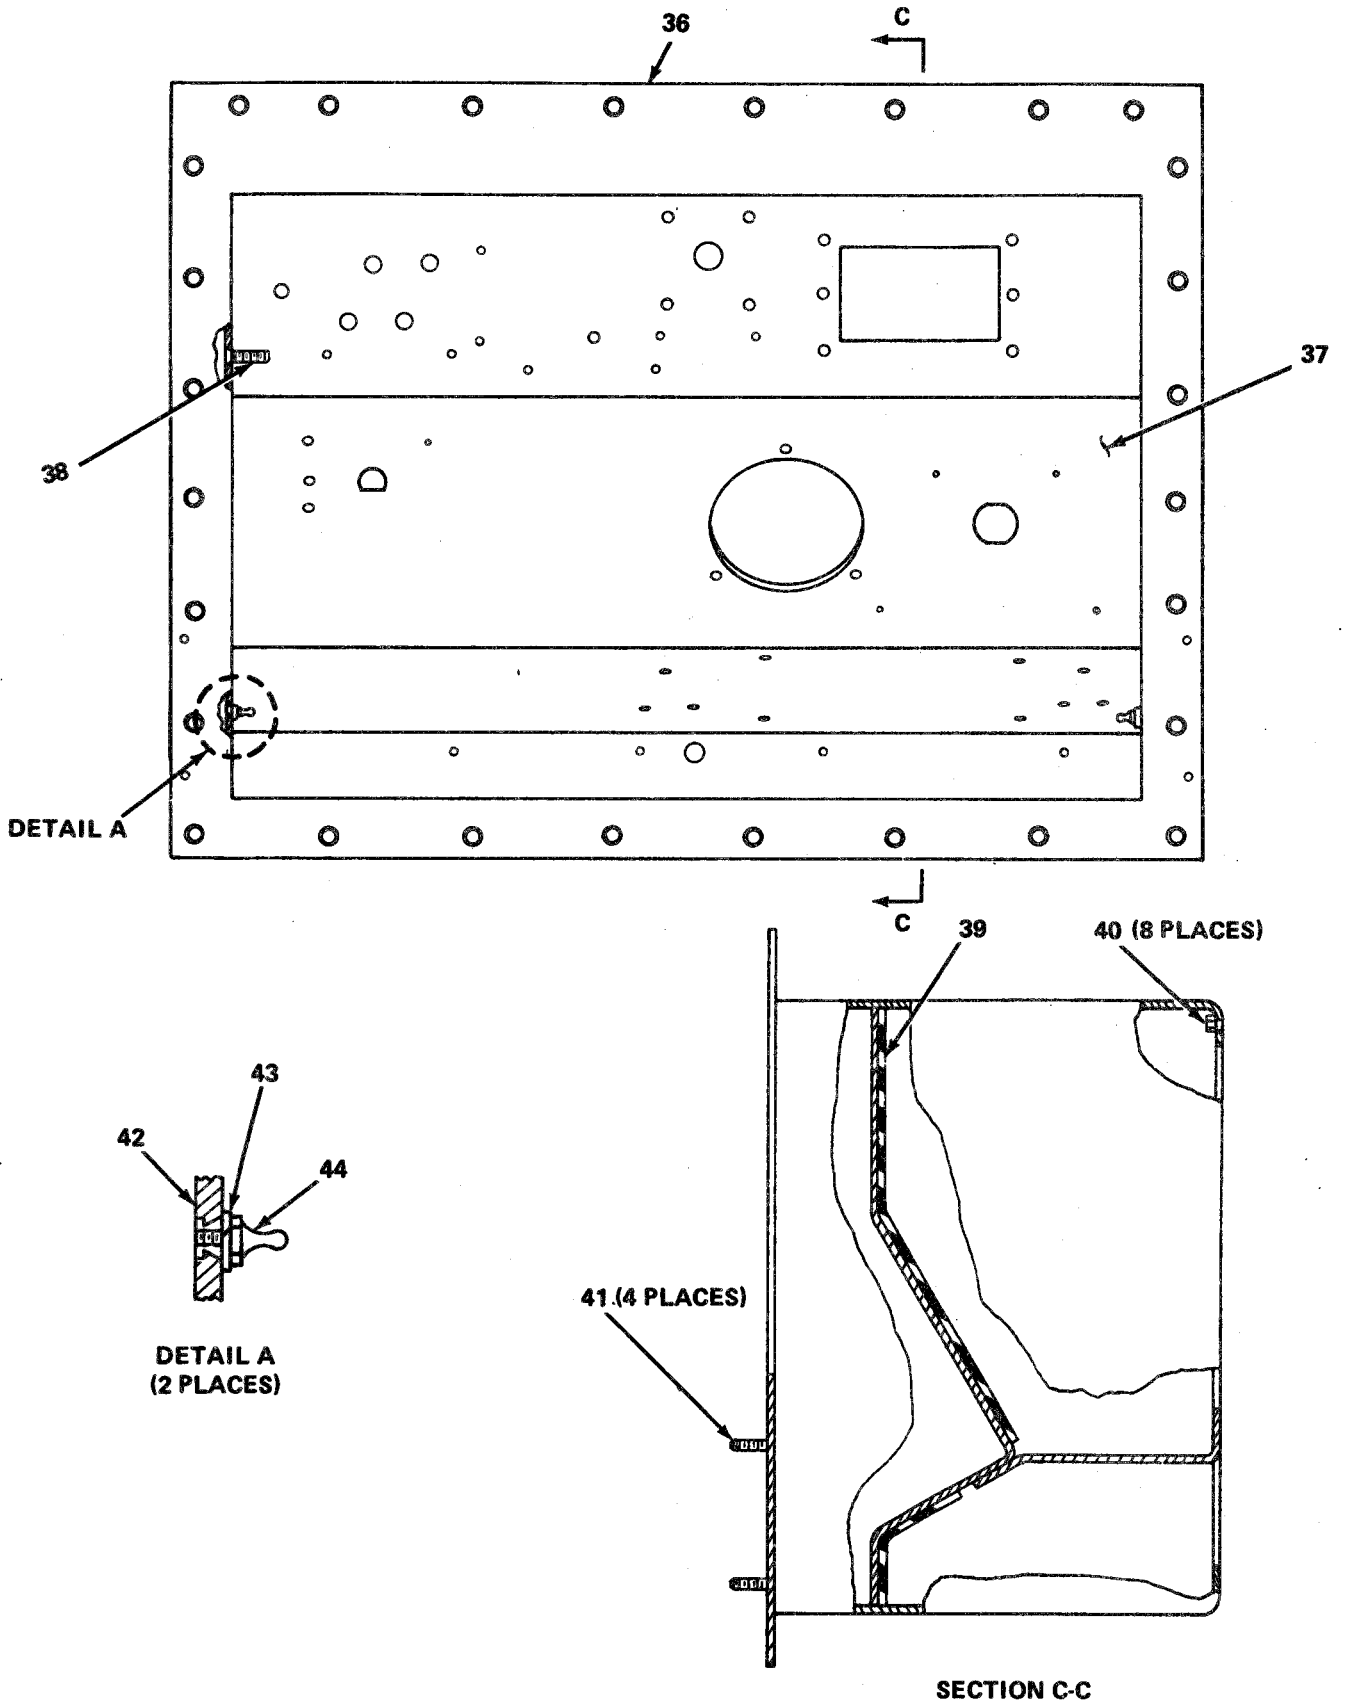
Power Entrance Box Assembly (Sheet 3 of 4)
